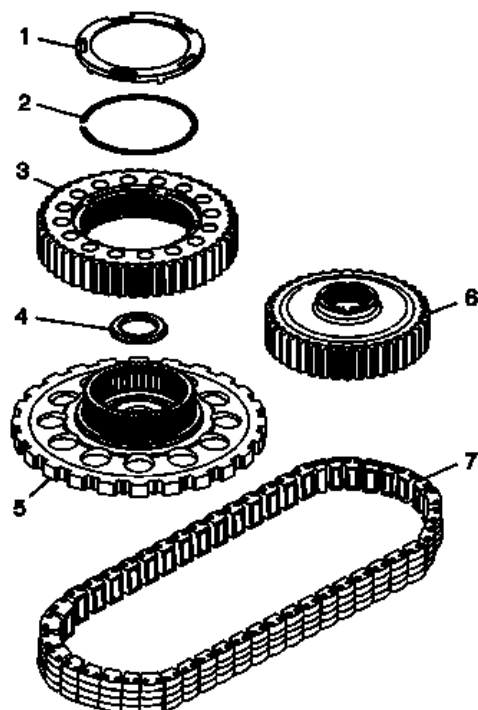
View Of Drive Sprocket, Driven Sprocket & Drive Link
